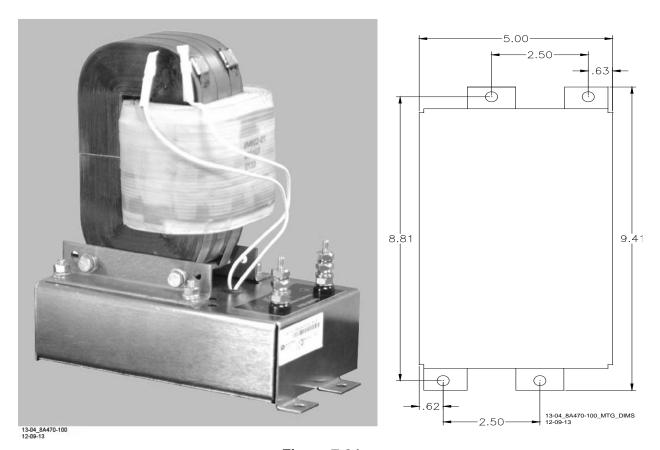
AC Code Unit, 8A470-100, With Mounting Dimensions
